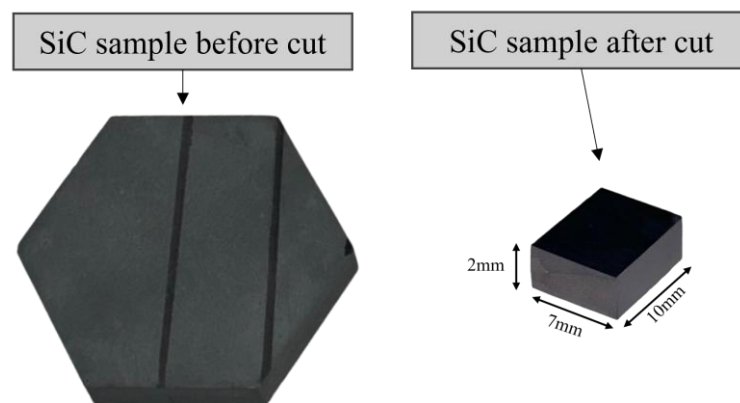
(a) Original silicon carbide sample marked for cutting; (b) Sample after the cutting process.
